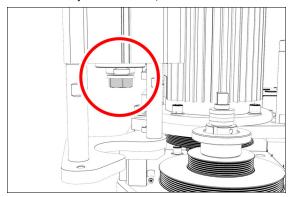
Hex head screw on the Power Drawbar cylinder's rod.
